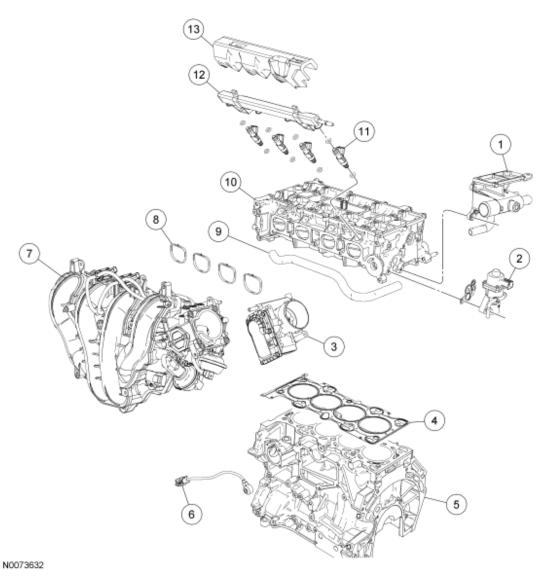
Exploded View Of Intake Manifold Courtesy of FORD MOTOR CO.
